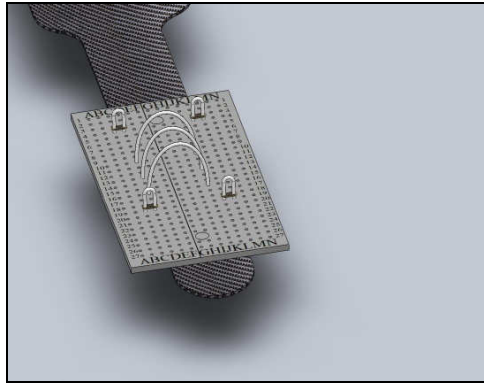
This is a front view of the finished peg board attached to the scanner bed.
